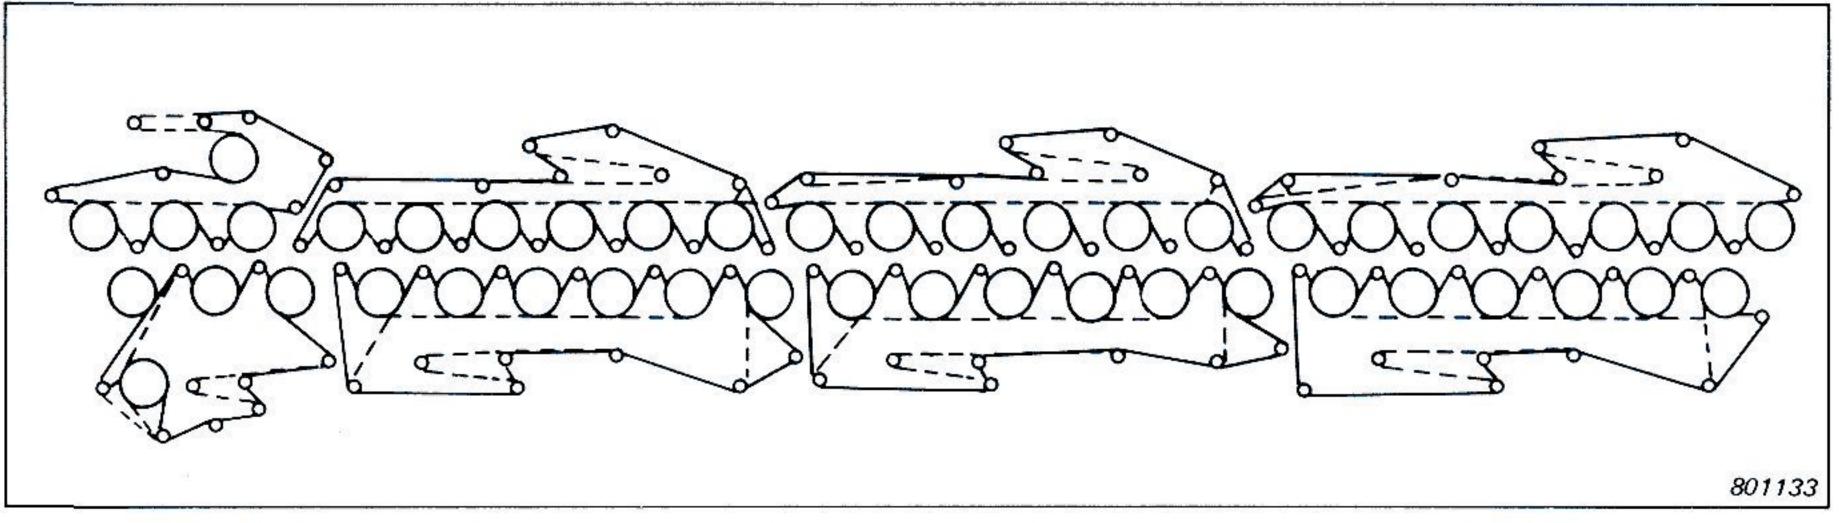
Schematic diagram of a paper machine showing the large number of rollers and consequently the even larger number of bearings involved
